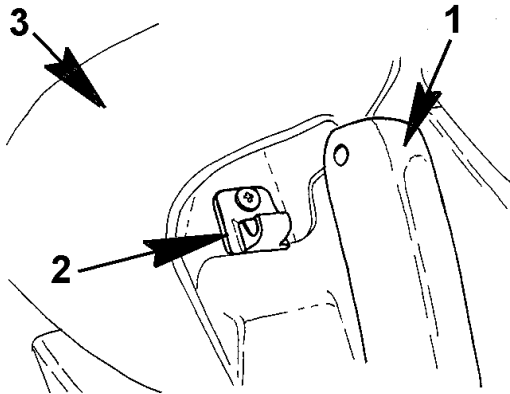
Upper Hood / Fender Latch Attachment — Driver Side Shown
